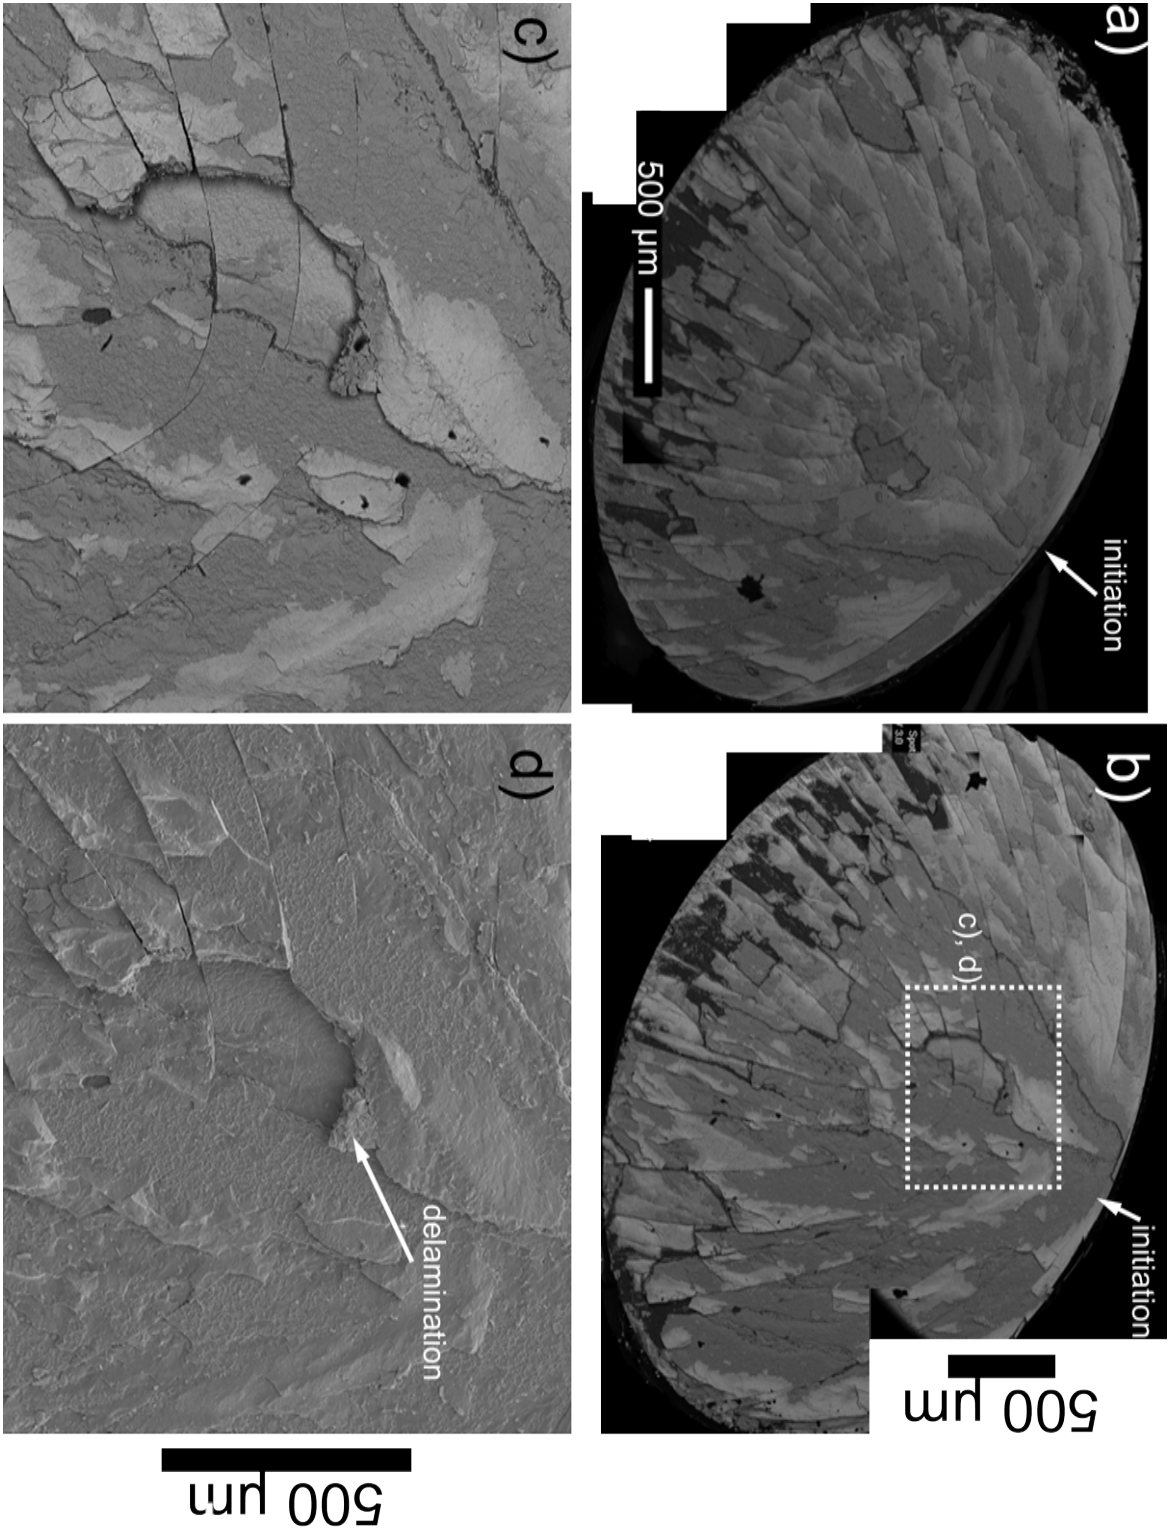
Fatigue fracture morphologies of specimens inclined at 45°.
